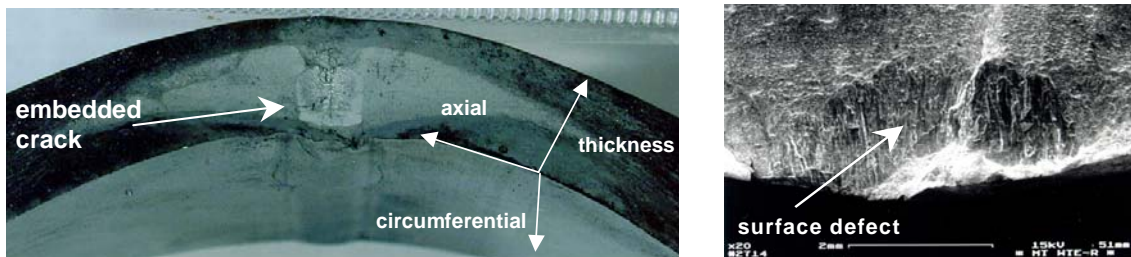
Defects in EB-welded D6AC model-vessels before burst testing
